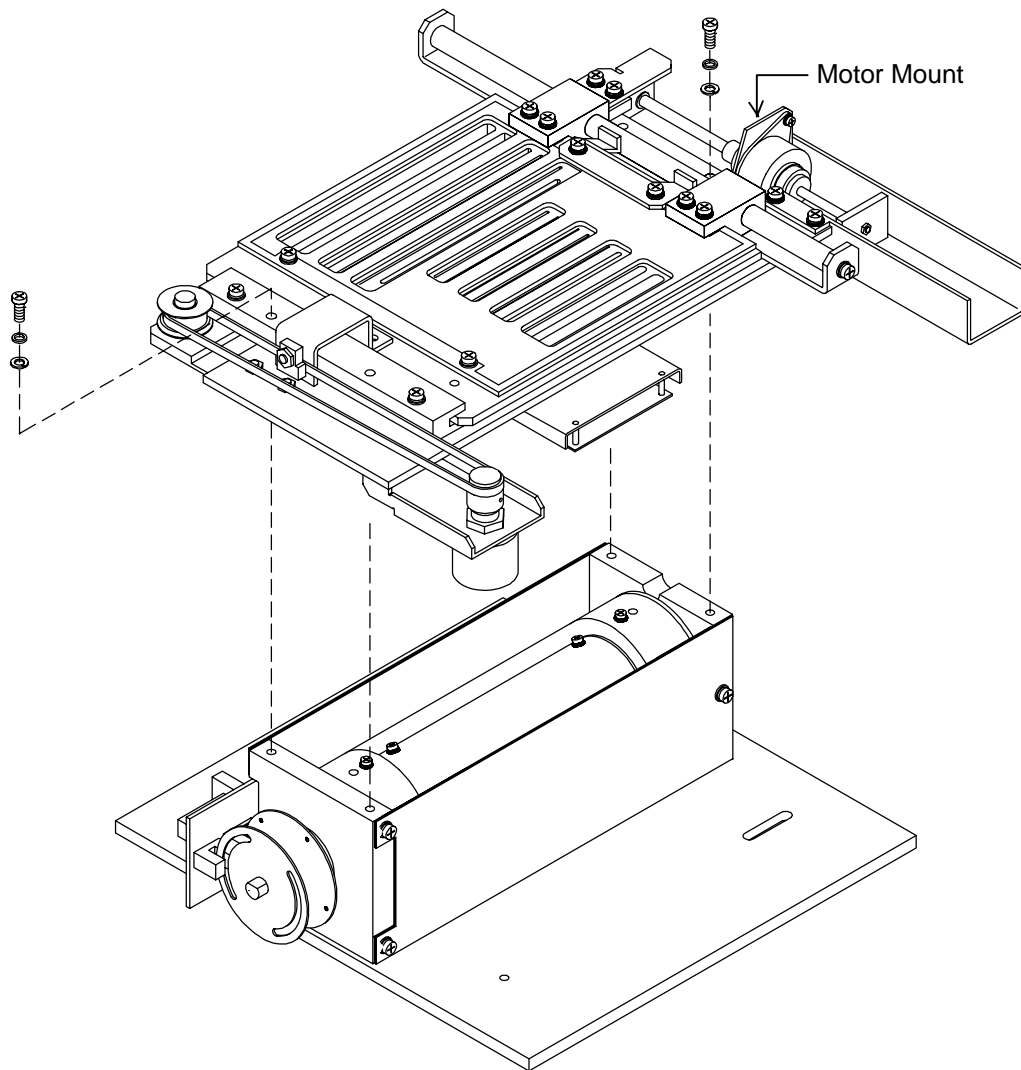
Aperture Assembly Removal (QDR 4500A and SL)
